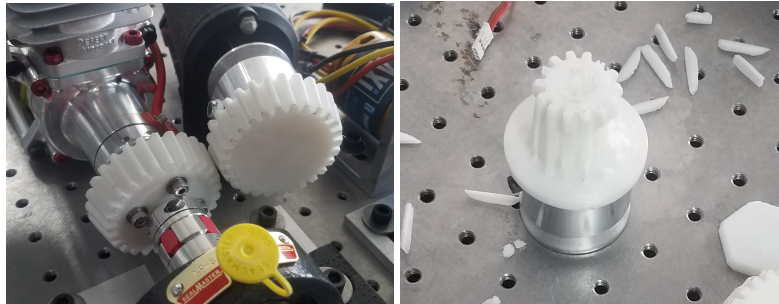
ICE starting method with direct drive 3D printed gears, shear failure from the high starting torque requirement.
